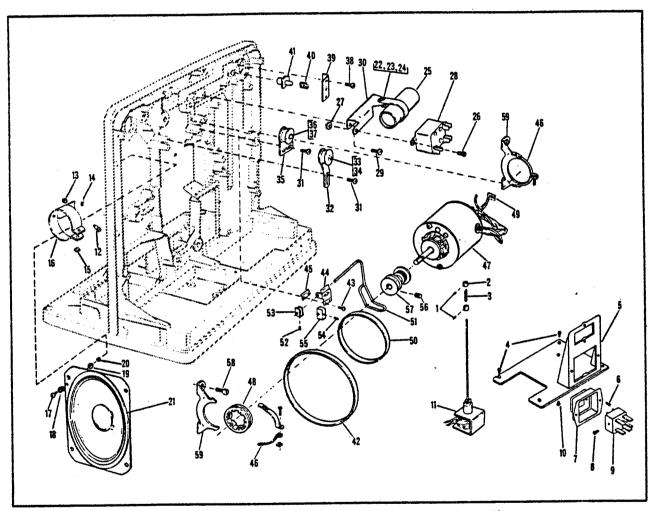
Filmosound Projector Main Plate Exploded (Sheet 3)
